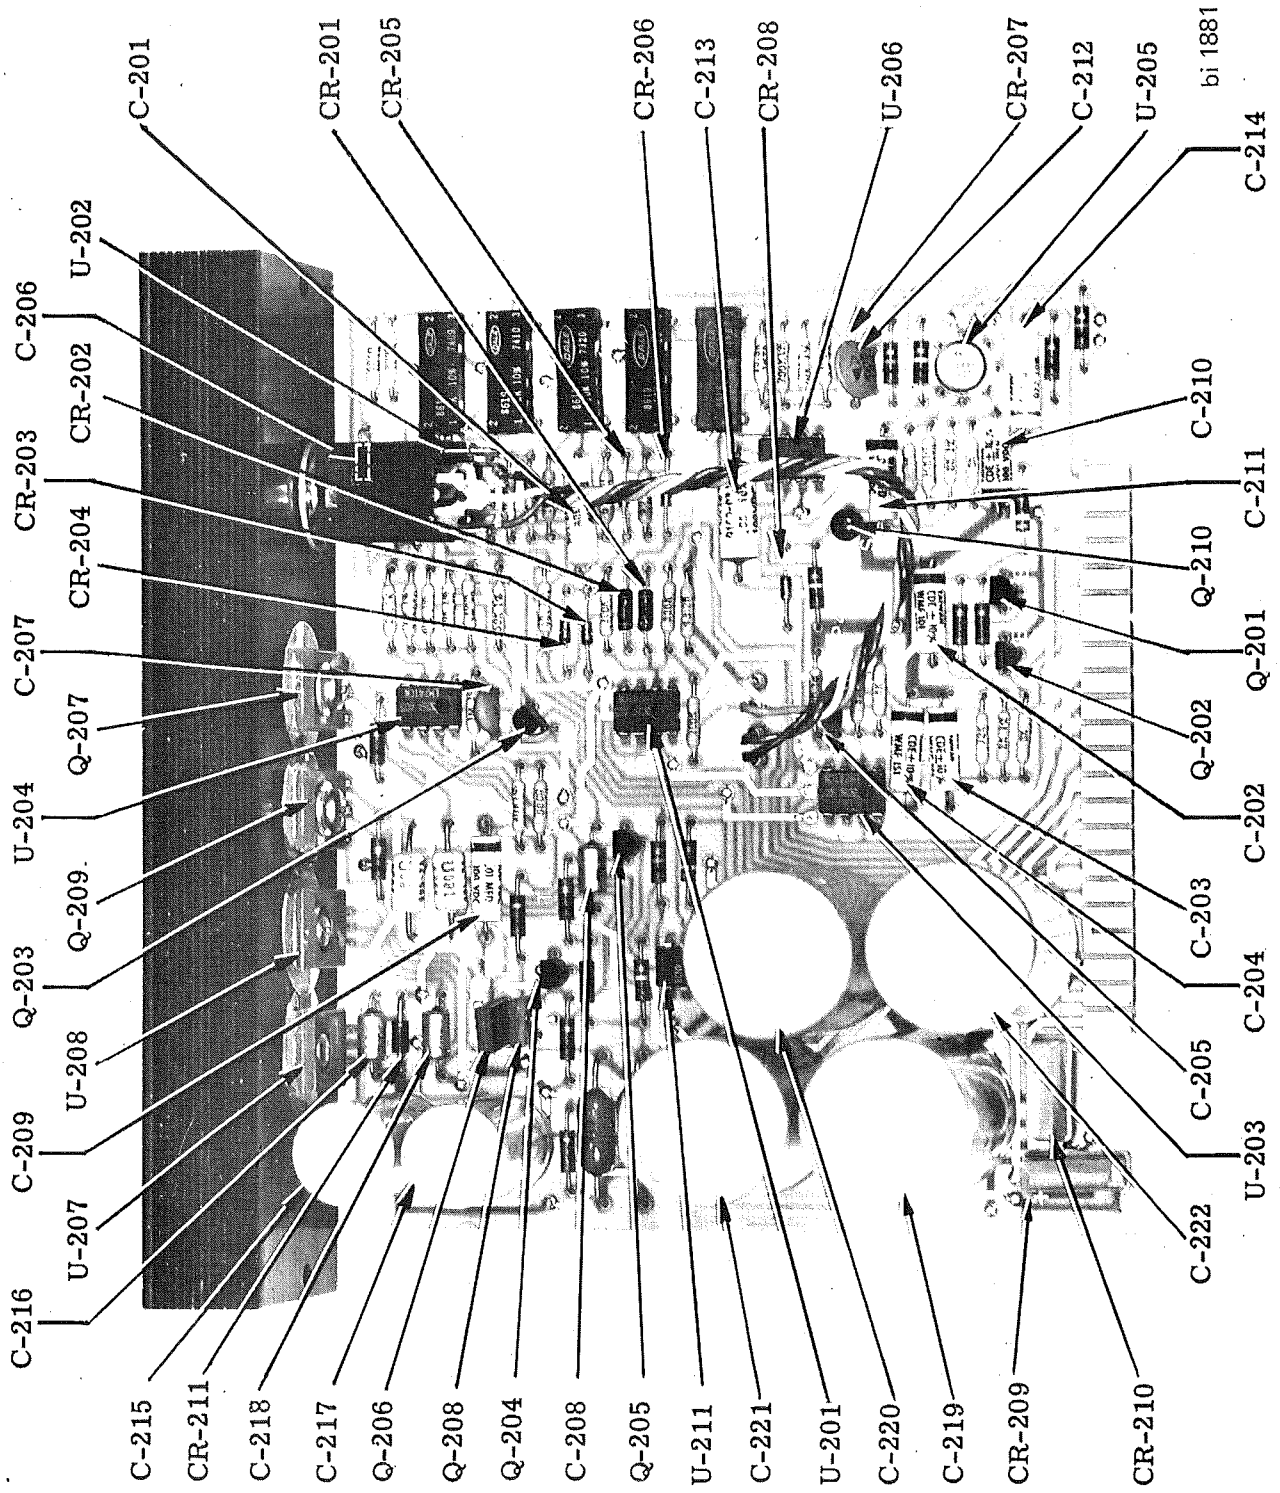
DRIVE AMPLIFIER ASSEMBLY (Sheet 1 of 2)
